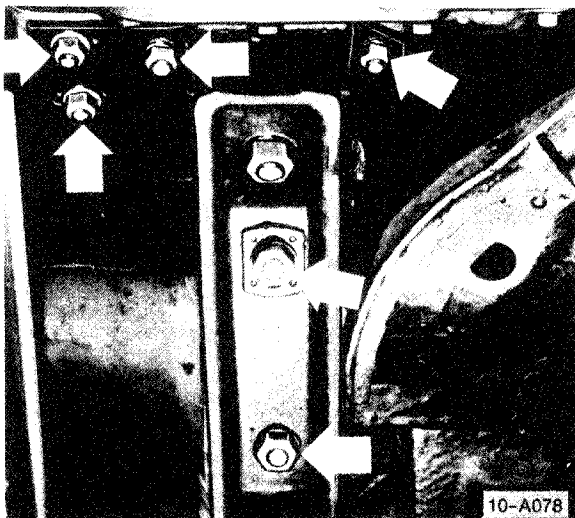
Nuts (arrows) to be removed to remove rear transaxle mount.
